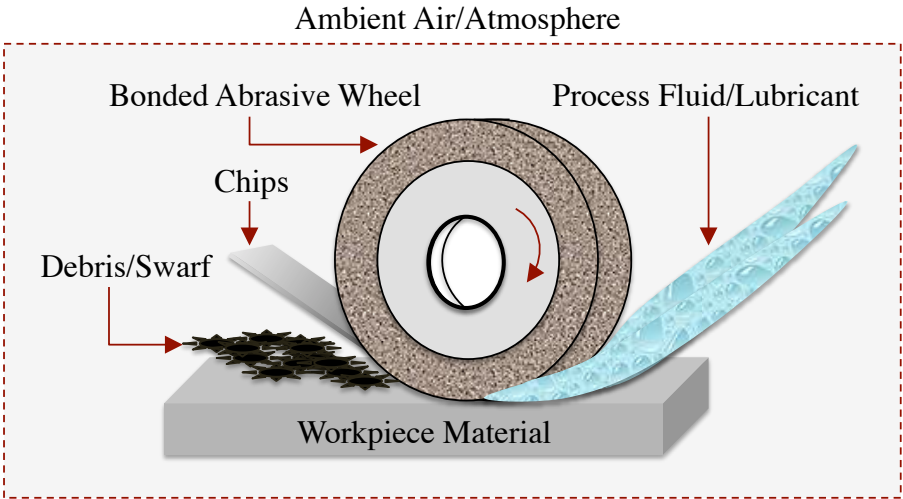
Precision grinding from standard flat grinding to complex forms [4]
